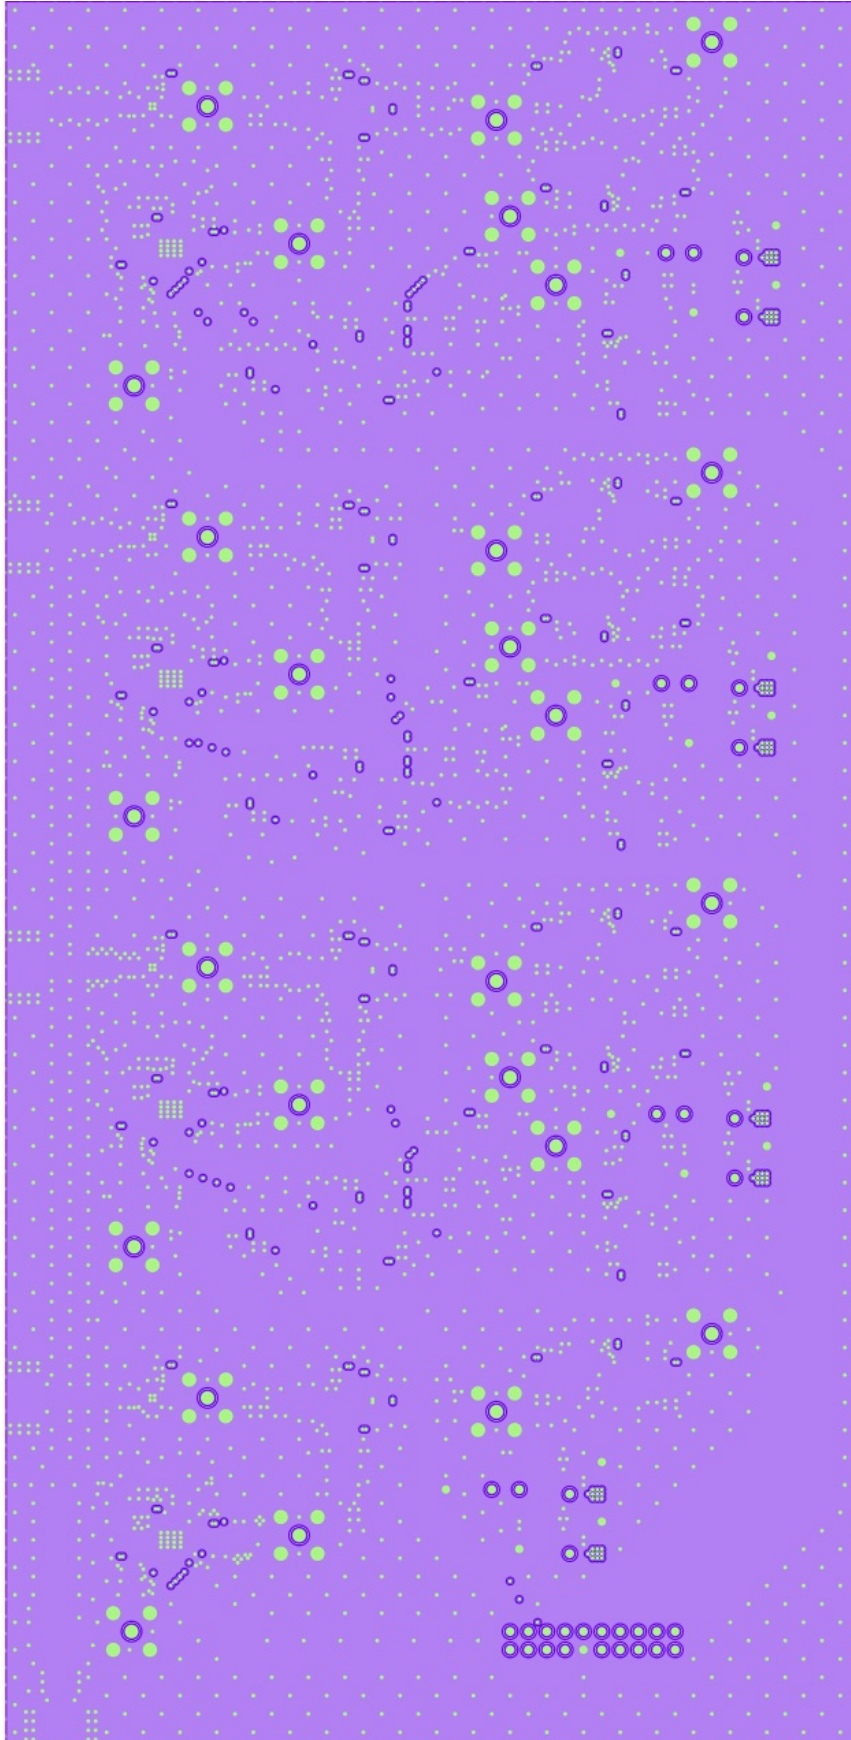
DLL-HPC received signal beamformer PCB inner layer 4
